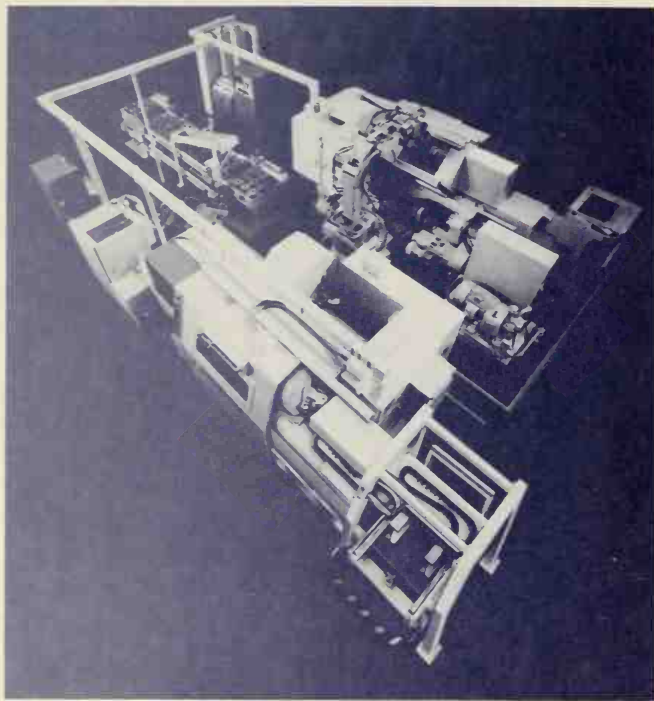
is a photograph of a flexible manufacturing machine/robot cell. In this CIM system, rough castings are machined and inspected. The system contains two CNC machines, gaging devices, a
